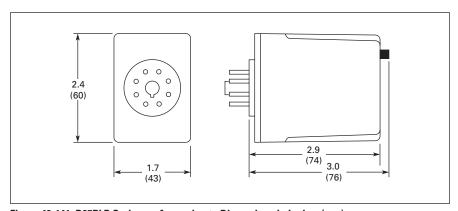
D65PLR Series — Approximate Dimensions in Inches (mm)
